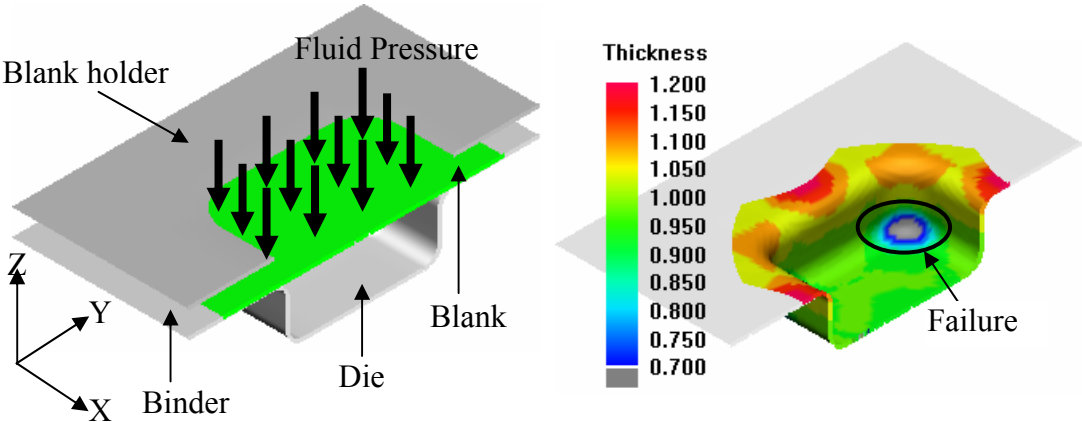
High pressure sheet metal forming simulation of square (I) cross-section, variant 1, prismatic workpiece
